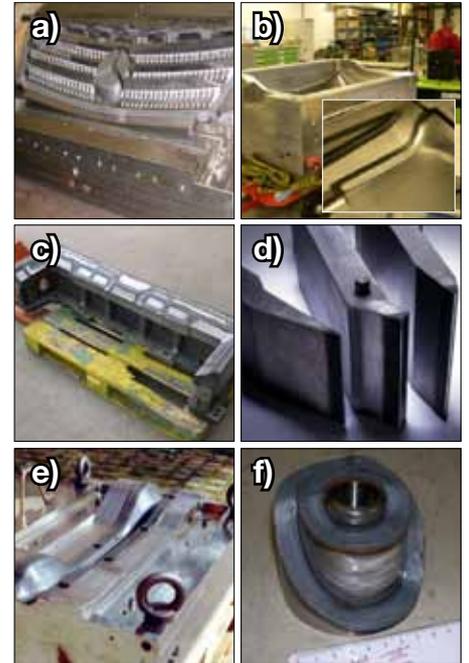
A selection of laser hardened components. (a,b) plastic injection molds; (c-e) forming tools; (f) control cam.
